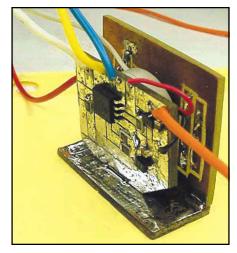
Soldering the IC board to the top board between the touch pad boards.
